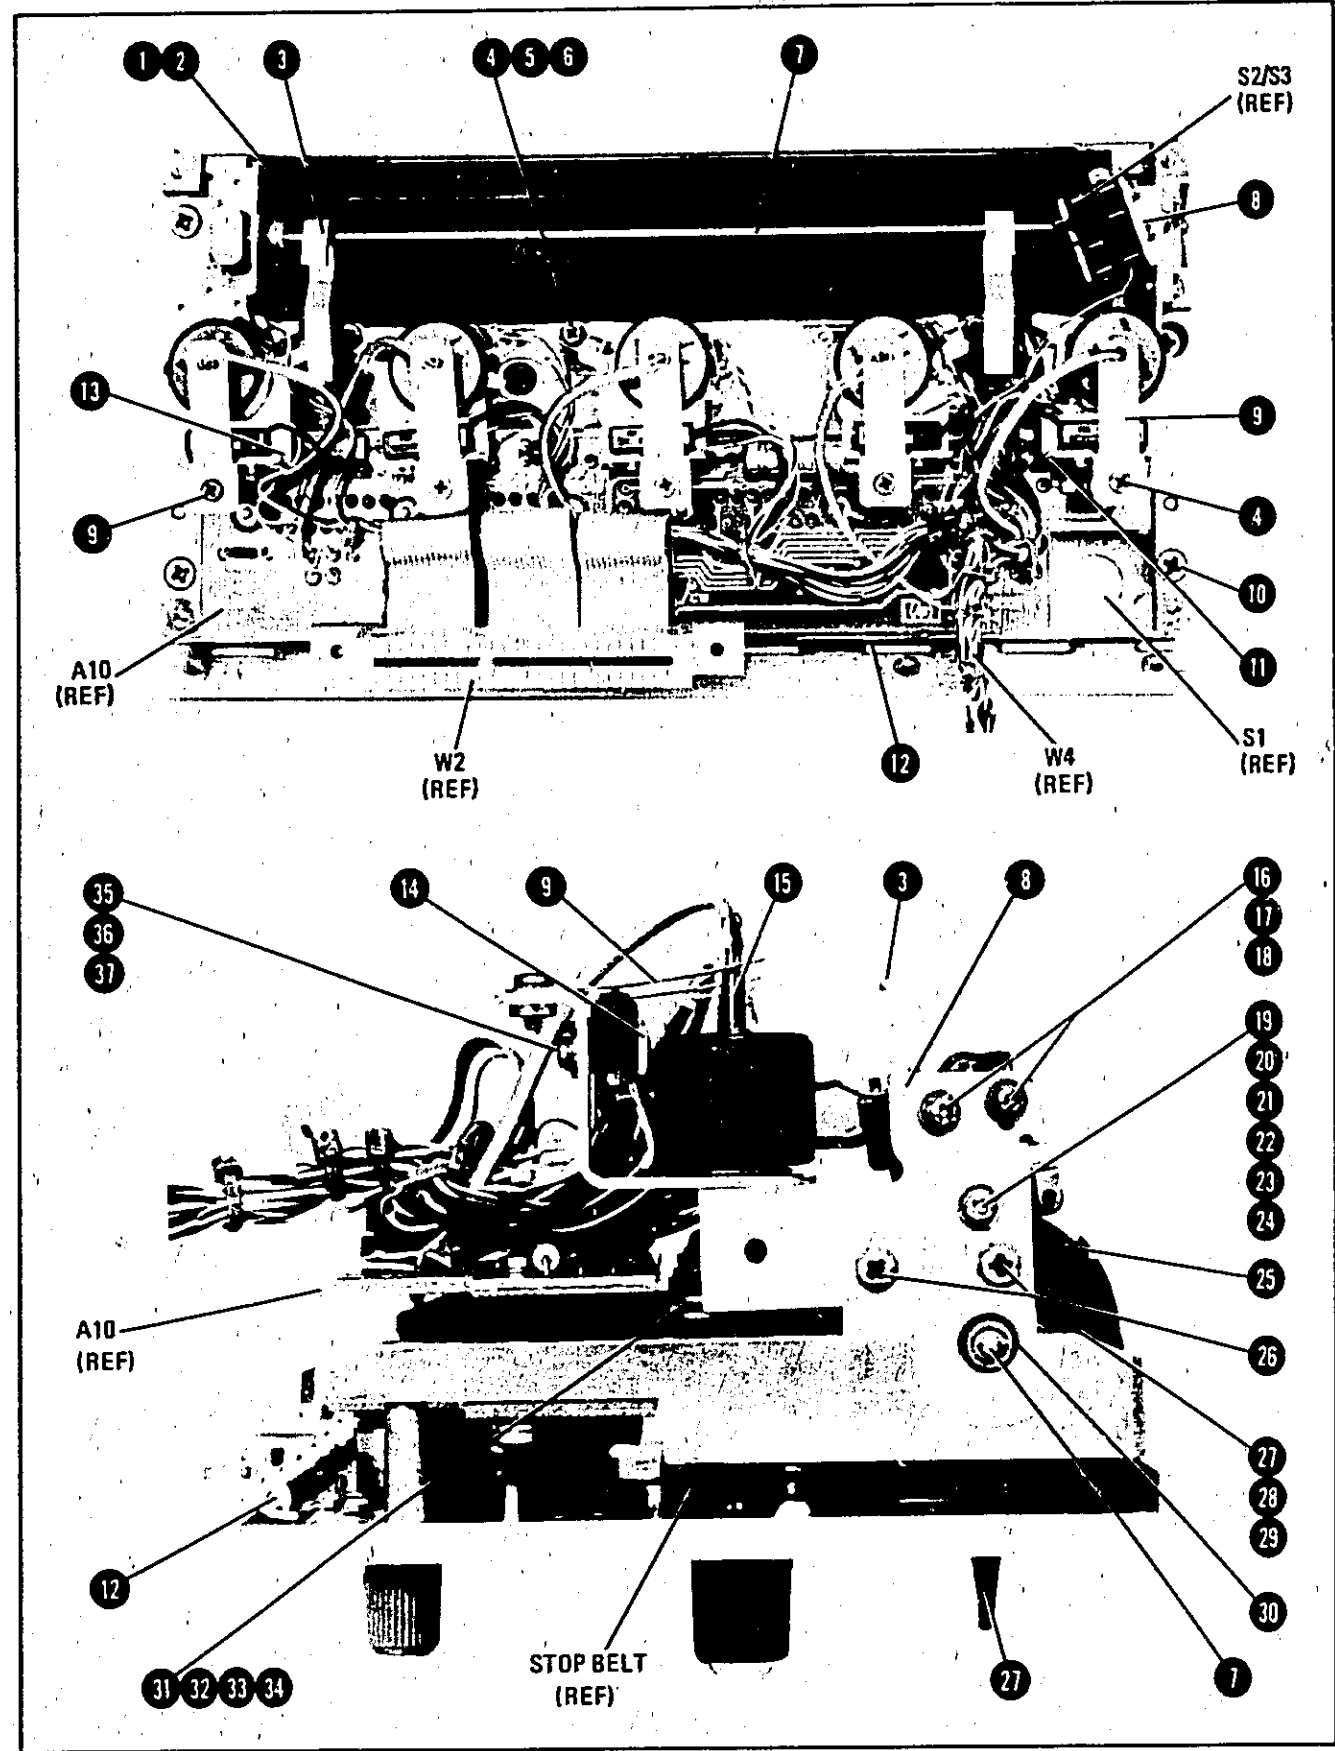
Front Panel Assembly, Parts Locations (2 of 4)
